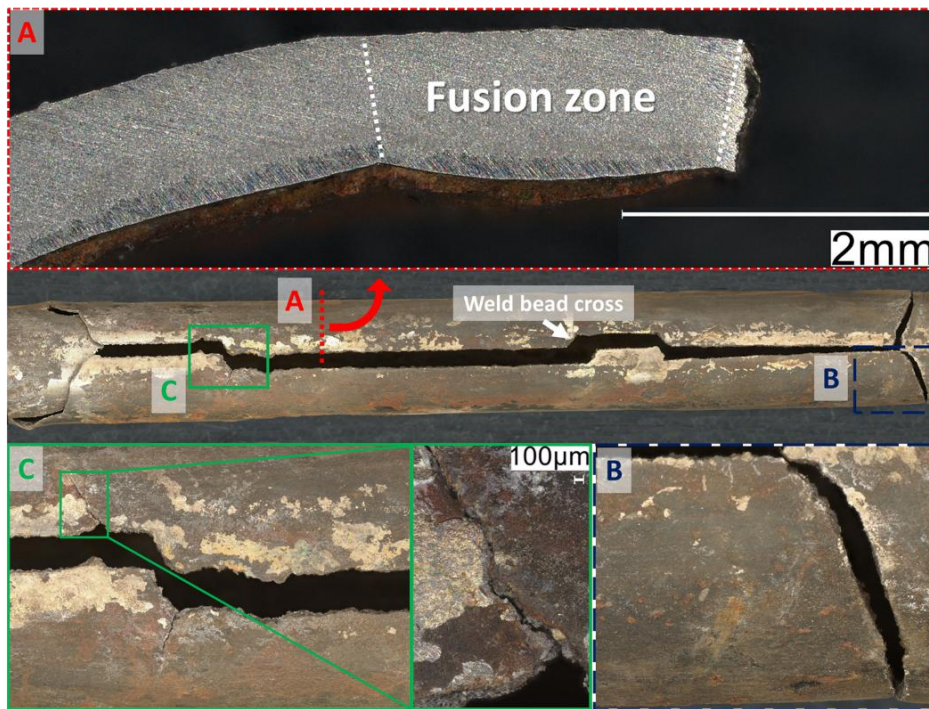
Classification of the different fracture zones. A) Axial break section along the edge of the weld seam, B) Branching and C) Secondary cracks
